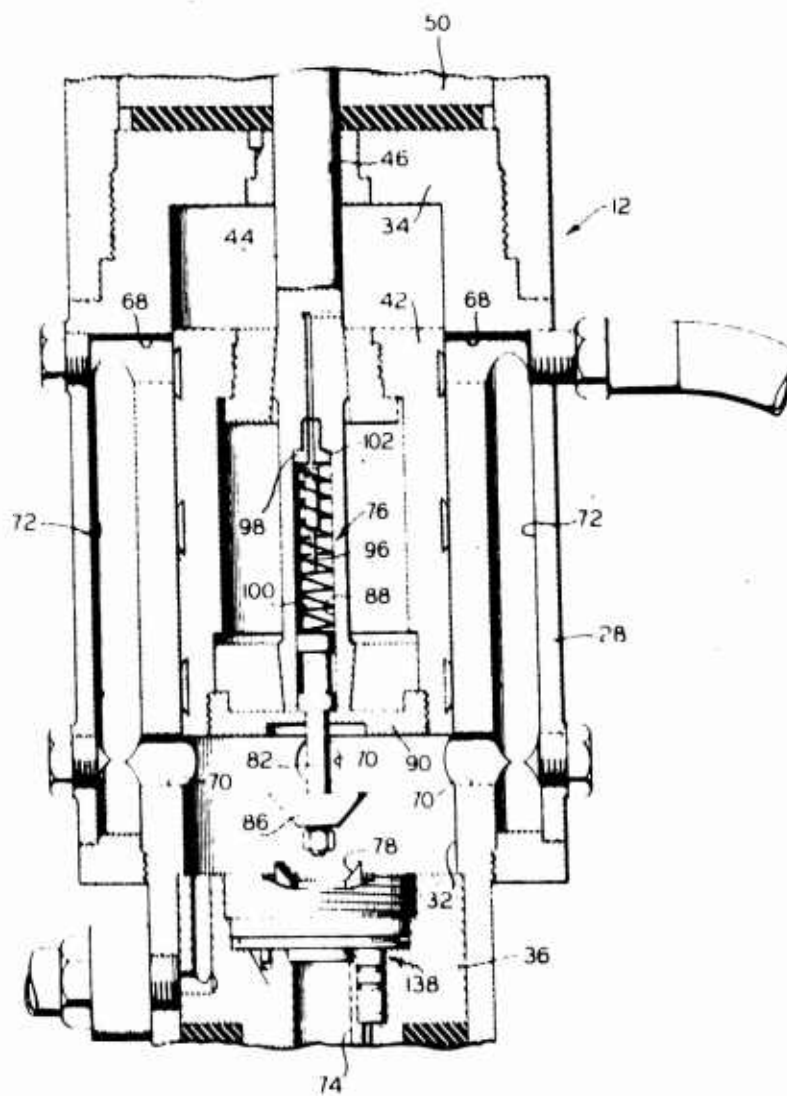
CYLINDER AND PISTON WITH VALVE ASSEMBLY EXTENDED
